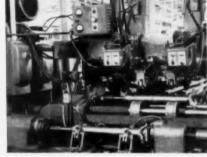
Easy Operation. Fittings are simply pressed over tubular shaft with hydraulic cylinder. Assembly is then transferred to welding station for "hidden-arc" welding in granular flux with "Automatic Lincolnweld" at speeds averaging 1-¾" in 10 seconds.
